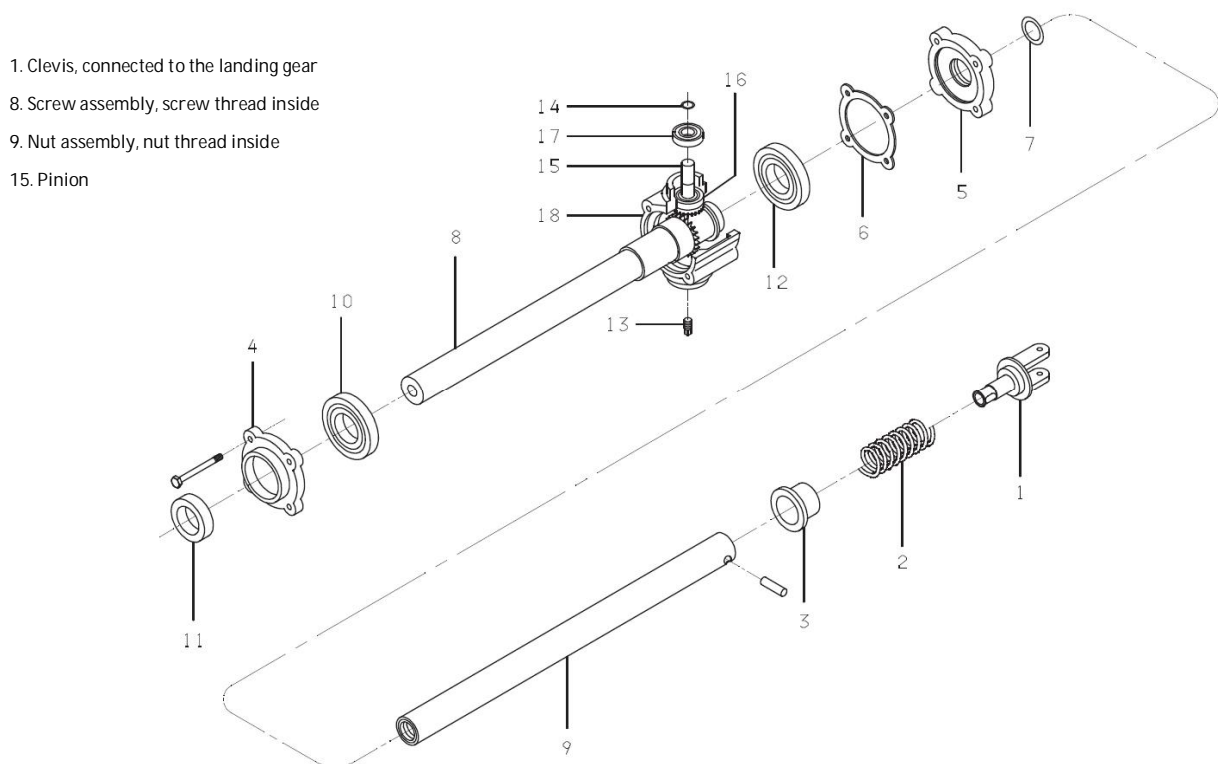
Parts breakdown of the nose landing gear actuator based on a screw assembly. (Source: Hawker Beechcraft Corporation)
